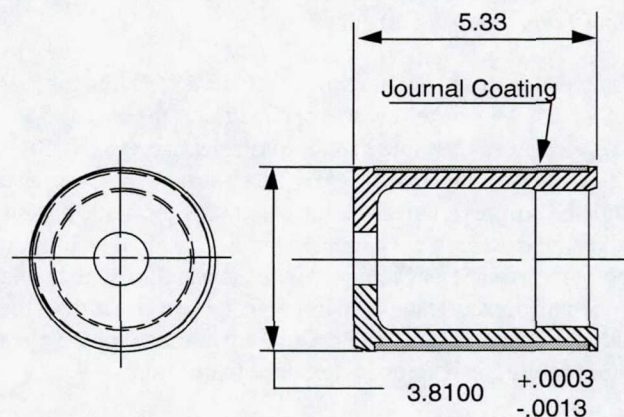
Journal specimen configuration showing dimensions and geometry (dimensions in cm).
